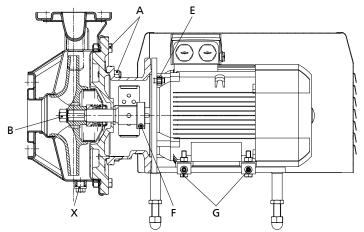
Tightening points for Etachrom B 050-025-250, 050-032-250, 065-040-250, 065-050-200, 065-050-250, 080-065-200, 080-065-250, 100-080-200, 100-080-250
